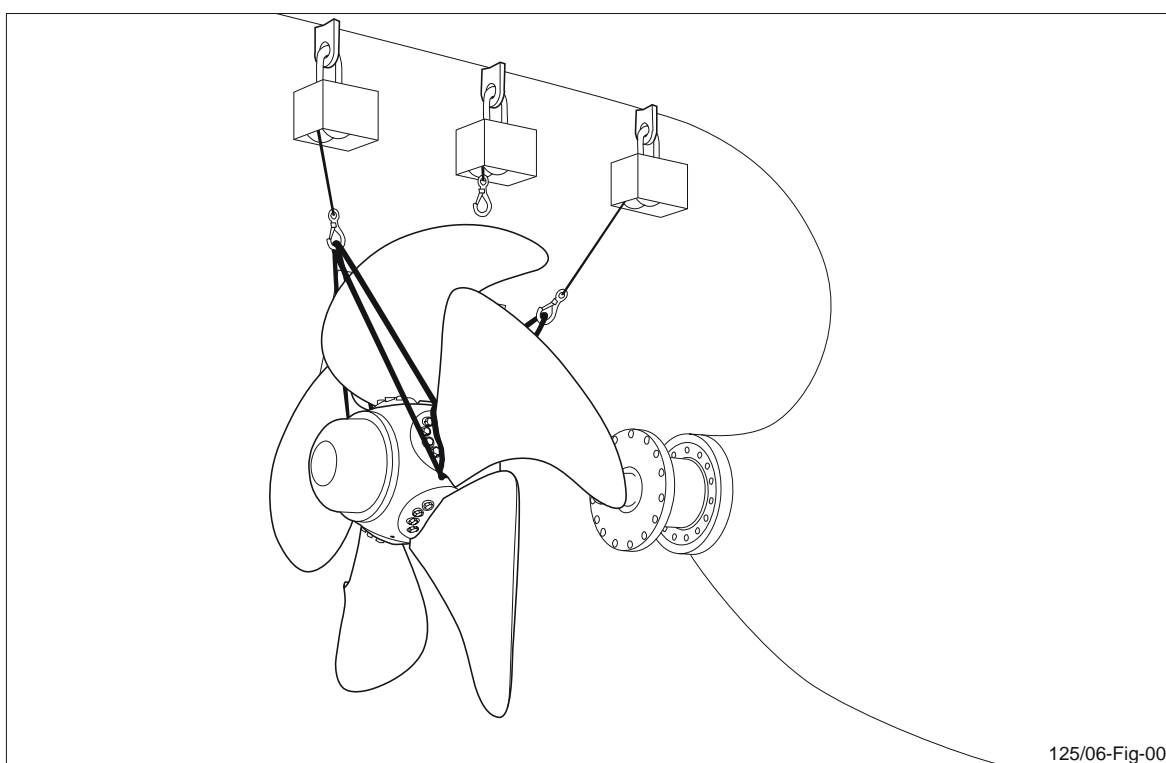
Lifting a small sized propeller hub with mounted blades using soft slings.
